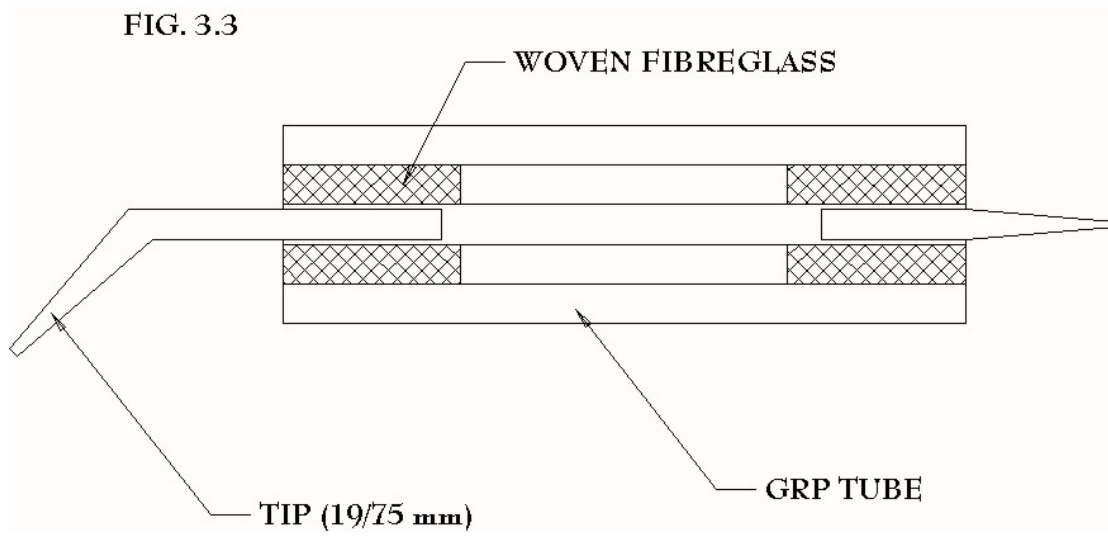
Layout of lightweight pinch bar extruded fibreglass tube.
